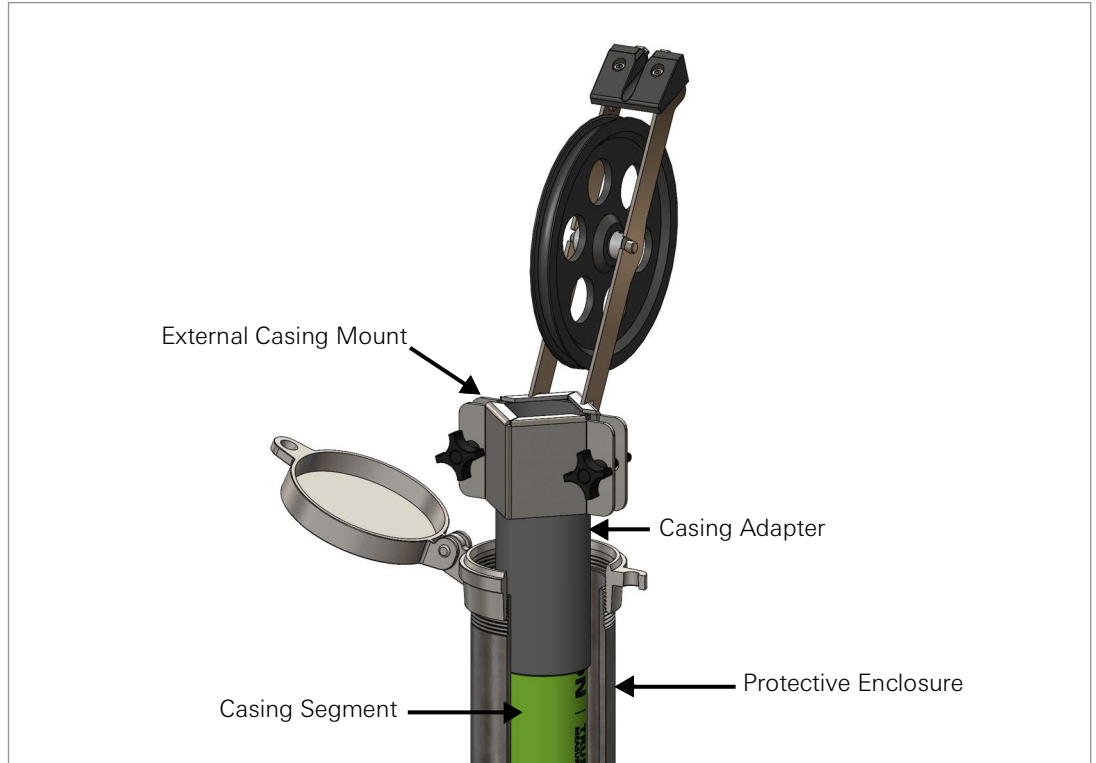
Model 6000-22 External Casing Mount Used in Conjunction with the Casing Adapter to Extend the Casing Above the Protective Enclosure
